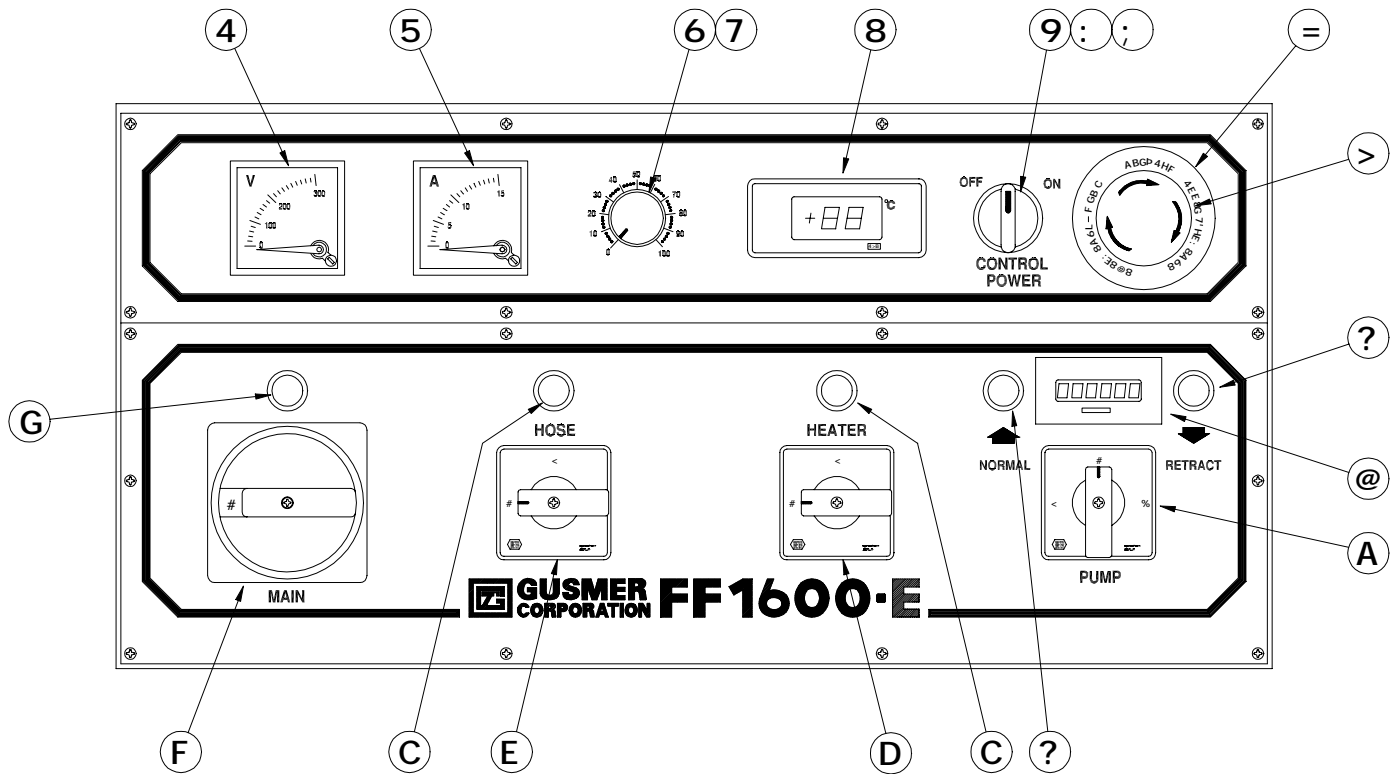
Electrical Console (Part No. 030-00004-000), Sheet 1 of 2
